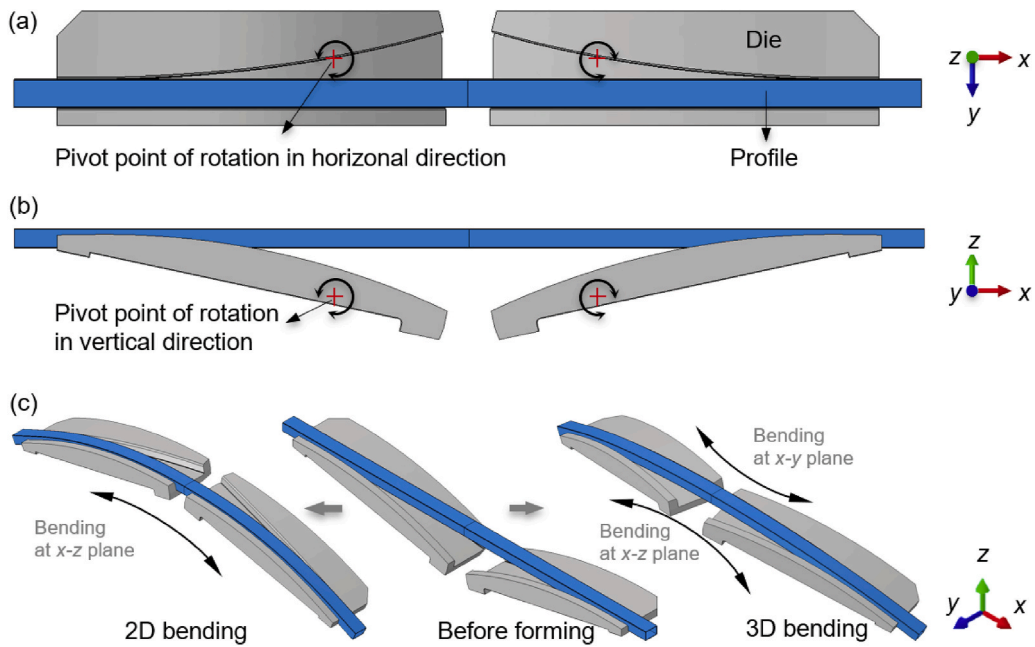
Geometries of formed parts: (a) top view before forming; (b) side view before forming; (c) schematics of 2D/3D forming processes.
